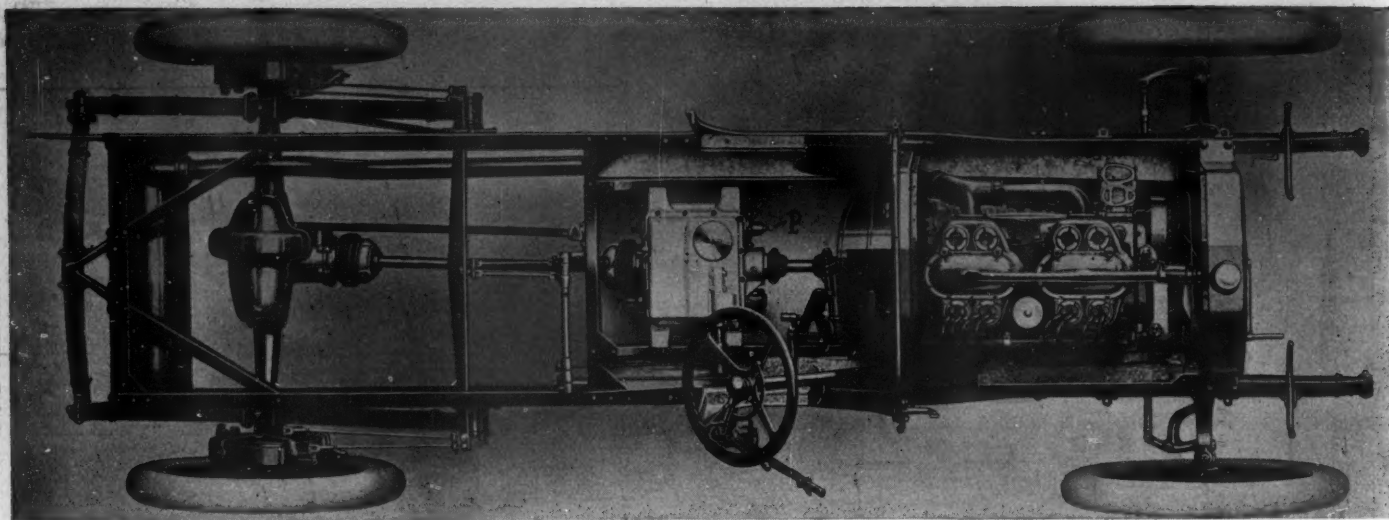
A PLAN VIEW SHOWING THE ARRANGEMENT OF 1911 PEERLESS CHASSIS
